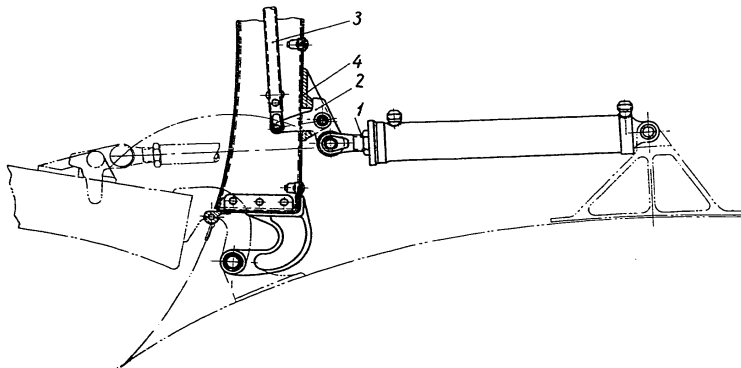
PLATFORM AND LOCK OPENING MECHANISM
